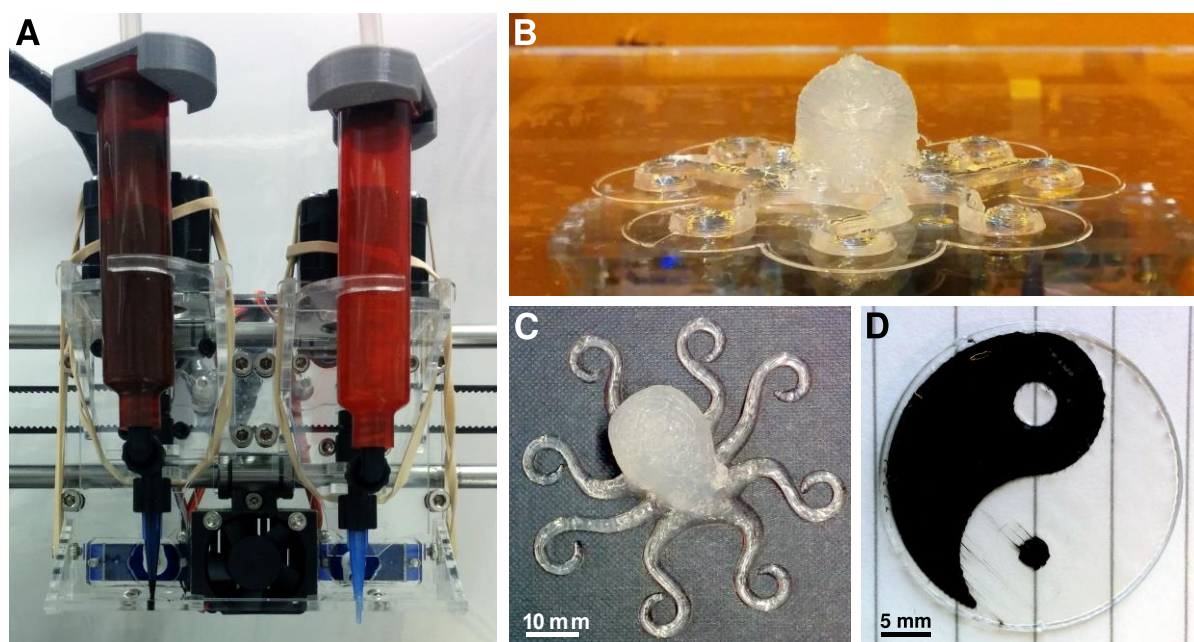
Print head and printed parts from the third-generation printer. A) The redesigned print head with two lifting nozzles. The UV LED, fan and heat sink are still mounted between the extruder nozzles, same as in the previous print head design. The servo motors used to lift the extruders are visible through the acrylic glass on either side of the LED fan. B) Printed octopus on the print bed. C) Top view of the octopus after removing it from the printer. D) Two-material test print with clear and black UV Electro.
